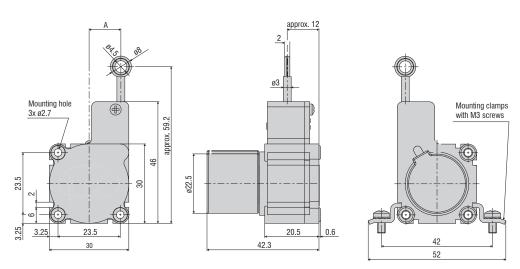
Dimensional drawing MK30 with potentiometer, dimensions in mm (inches)
